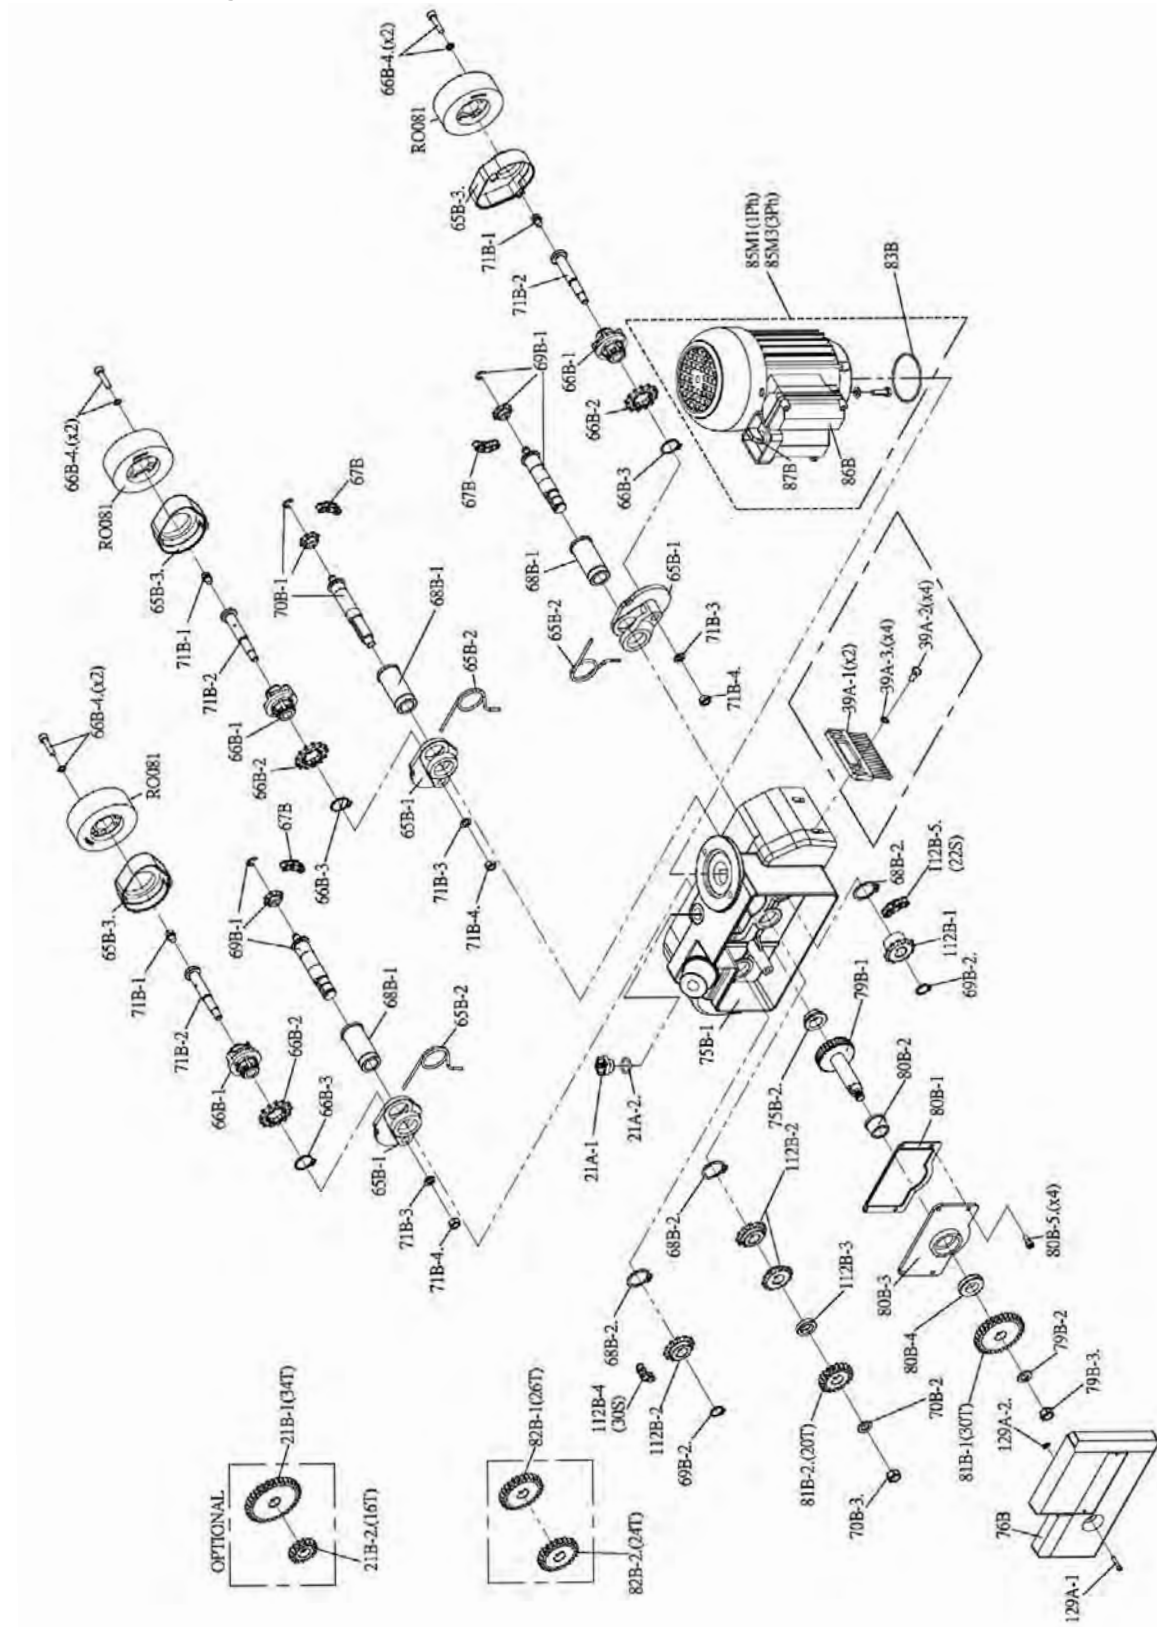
Spare parts drawing 1 - feed unit VSA 32
